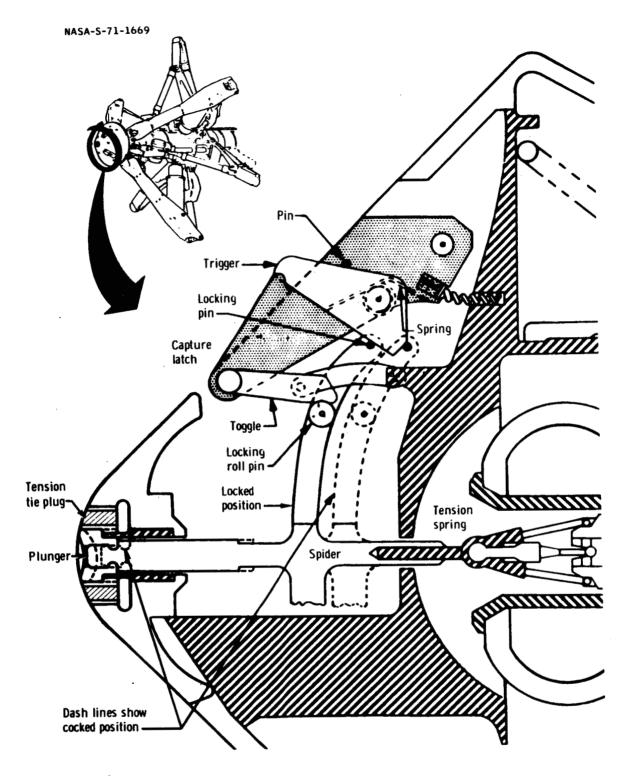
Cross section of probe head and capture-latch assembly.
